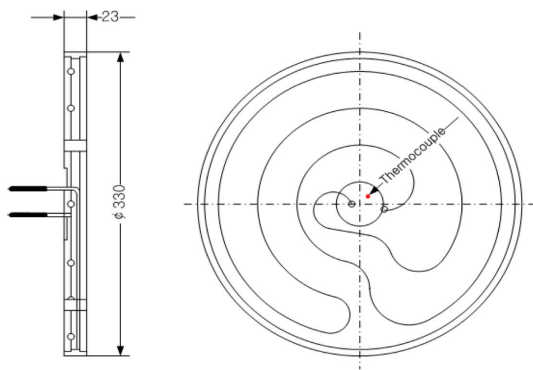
Cross-sectional view and heater pattern for the heater plate.
